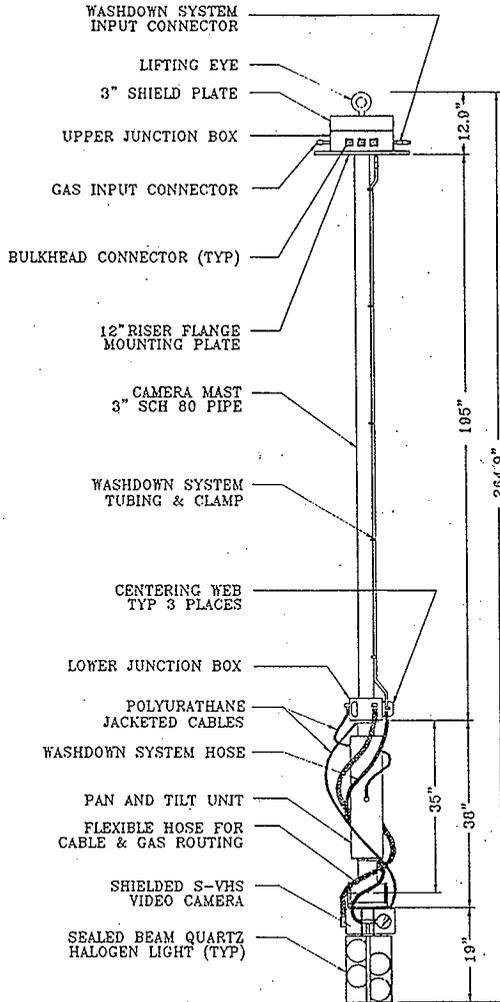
C-106 CAMERA ASSEMBLY, PHYSICAL ARRANGEMENT
